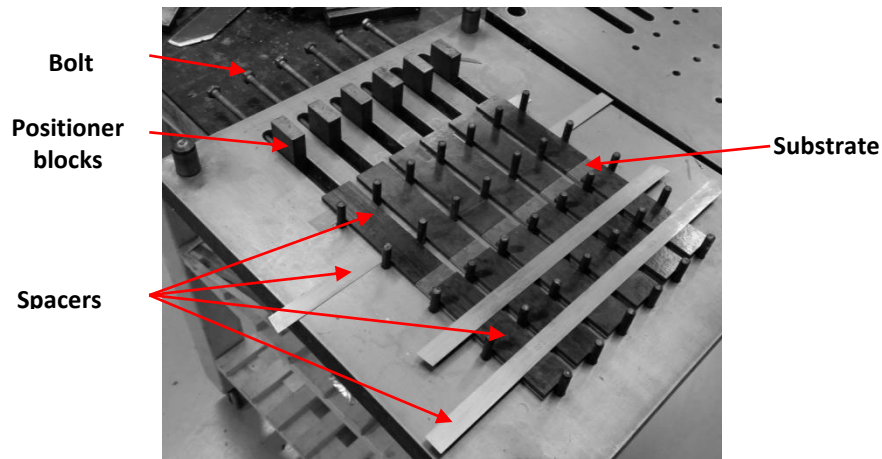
Mould used to manufacture the joints; prepared for the application of adhesive
